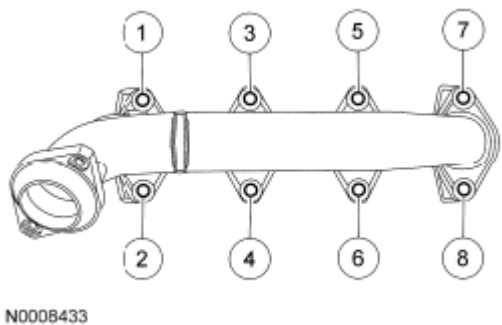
Identifying RH Exhaust Manifold Nuts Tightening Sequence
